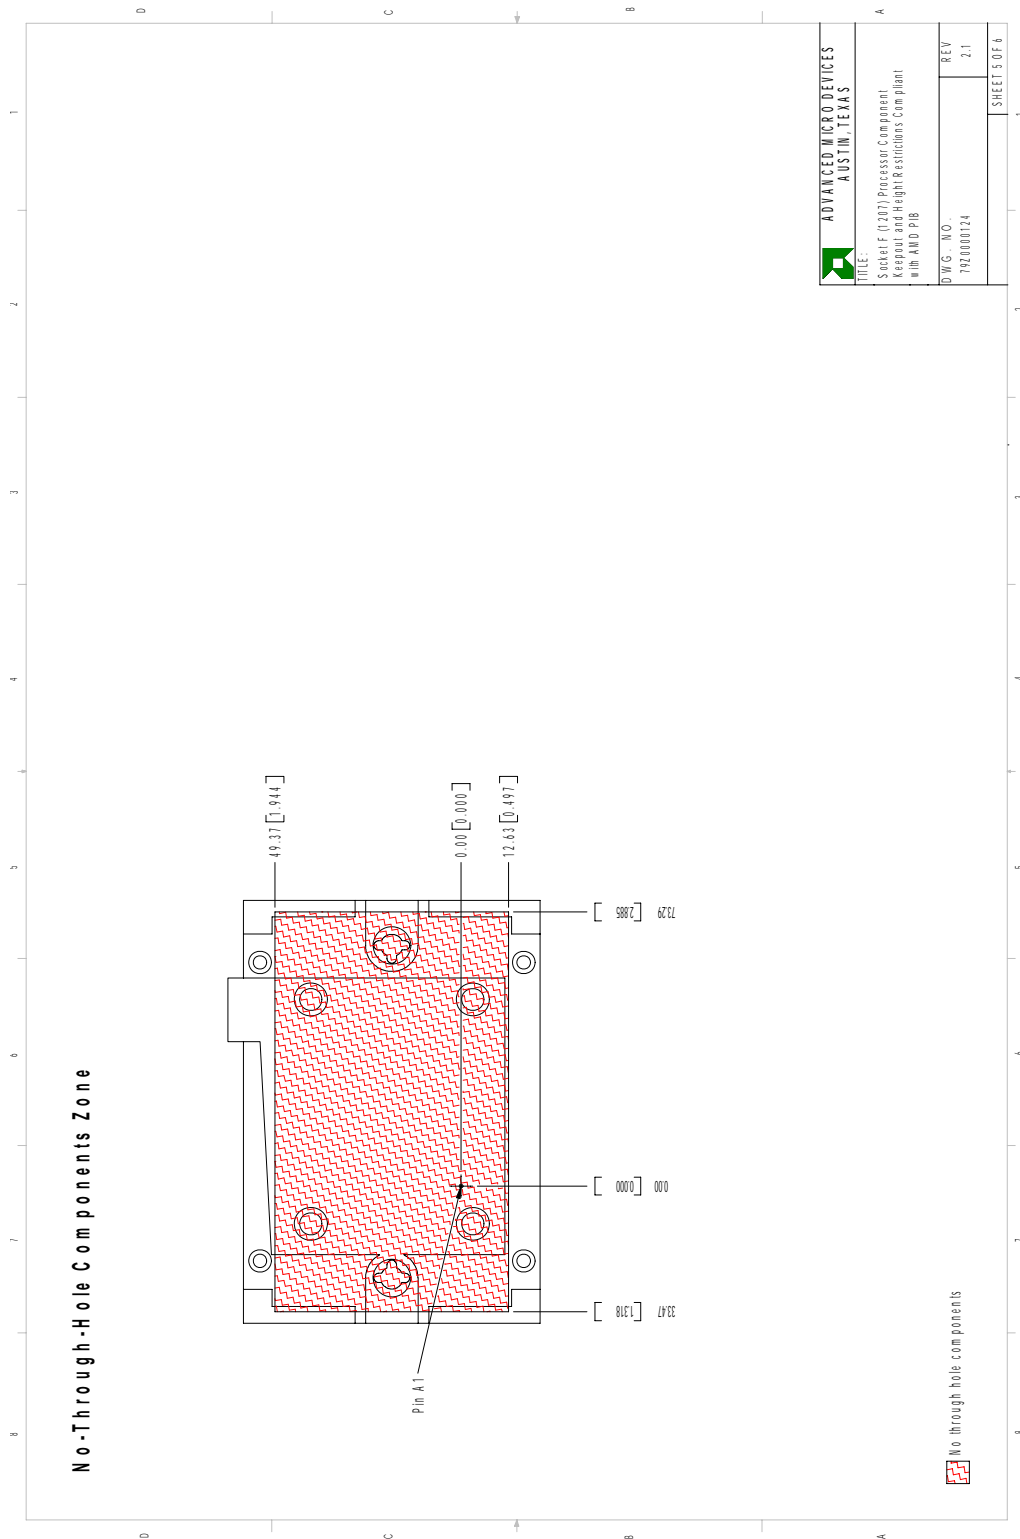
Socket F (1207) PIB Board No-Through-Hole Keep-Out
